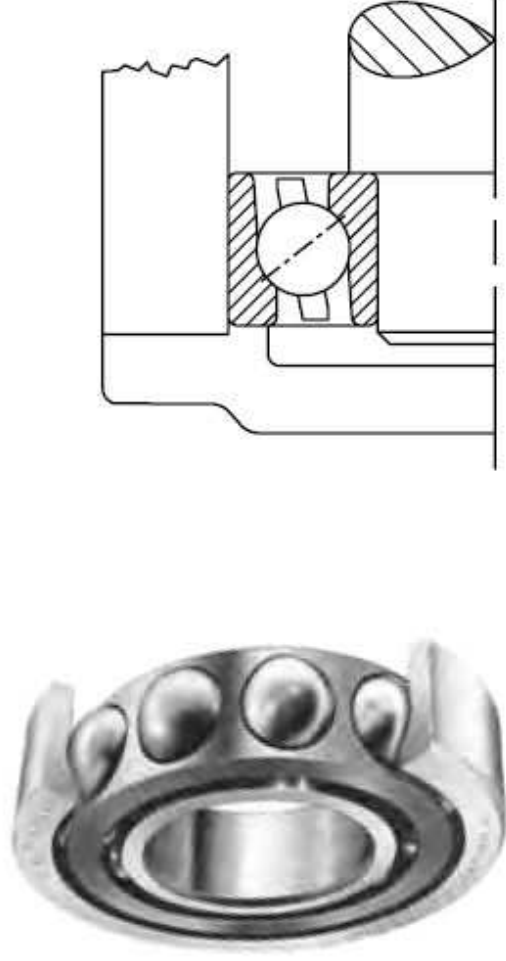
Typical mounting for single-row, angular contact ball bearings.
